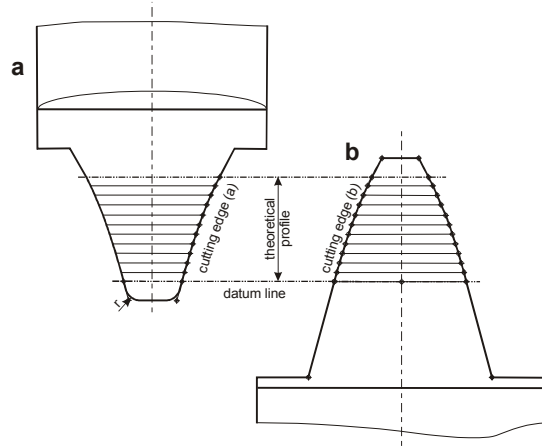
Cutting tool profiles in the normal section: a) gear cutting tool profile, b) worm cutting tool profile
